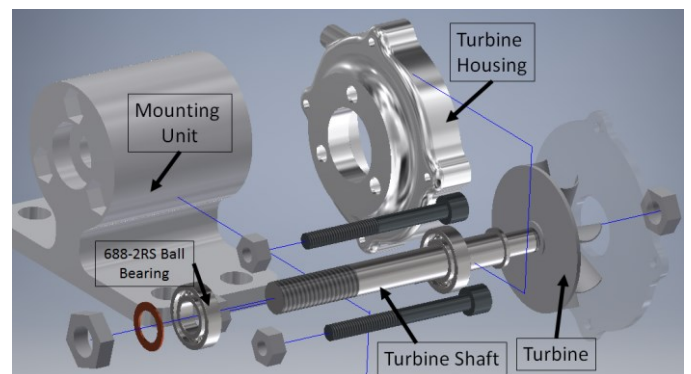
Exploded view of turbine rig assebley showing major componets.
